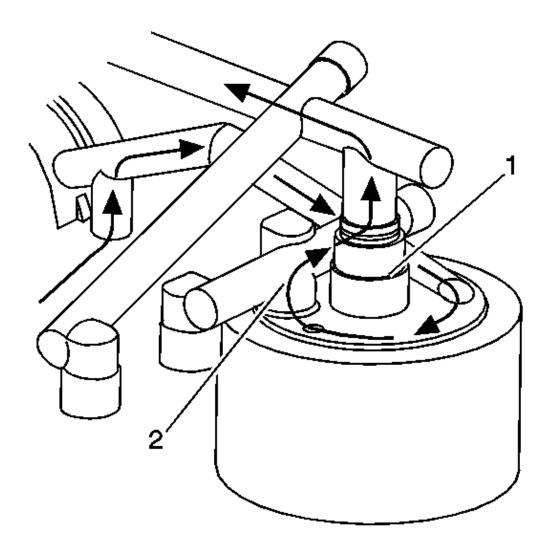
View Of Oil Flow (With Oil Filter & Oil Cooler Plugged) Courtesy of GENERAL MOTORS CORP.
